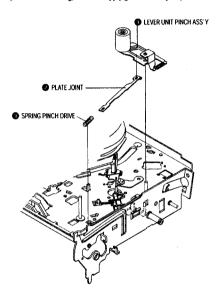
Lever Unit Pinch Ass'y, Plate Joint, Spring Pinch Drive Removal
